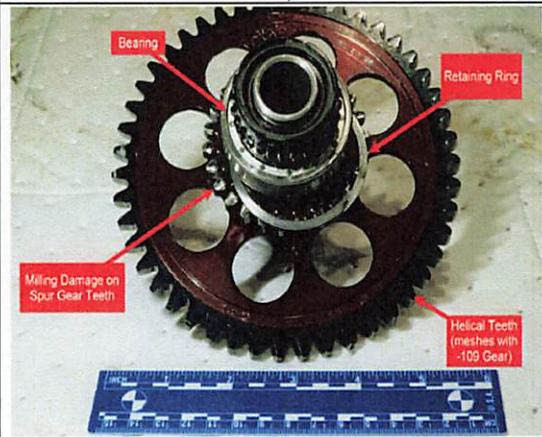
Photo of -101 Input Helical Gear Damage (Tab J-47)
